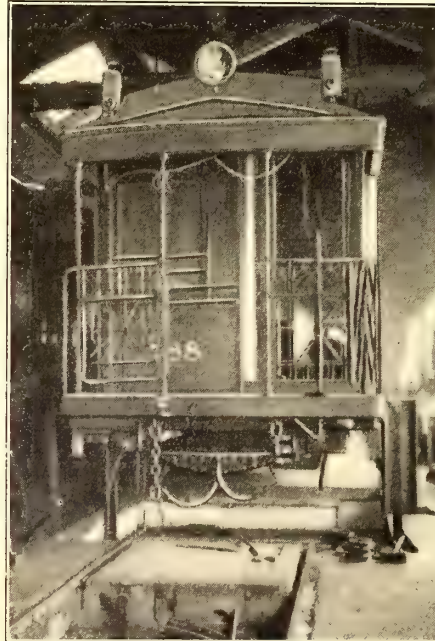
CAR OVER ELEVATOR, WITH TRUCKS REMOVED
